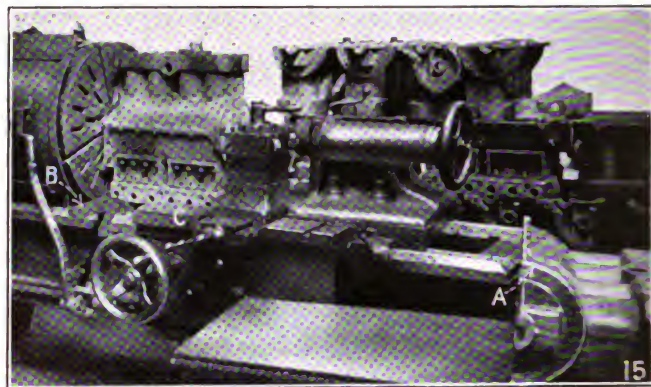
Turning ends of crankcases bolted up in pairs, in large lathe
